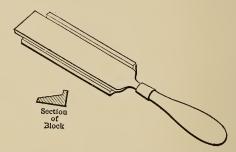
Block to Guide the Flat Chisel in Wood Turning.
